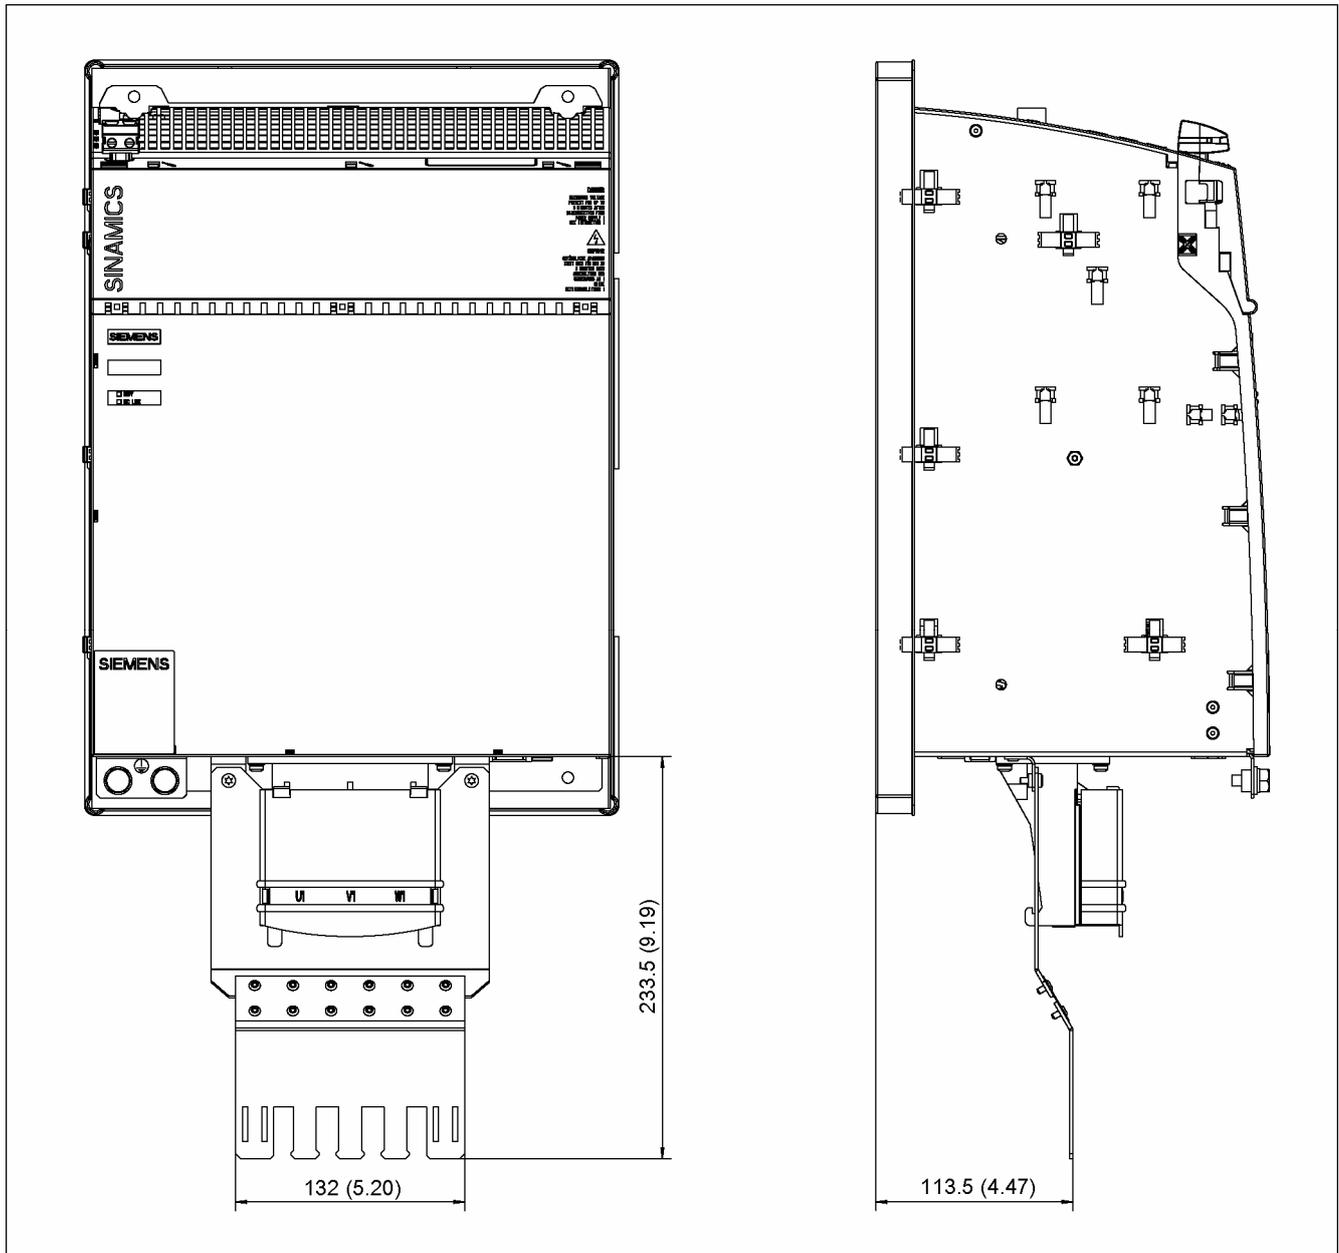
Dimension drawing, shield connecting plate on a 200 mm component with cold plate
